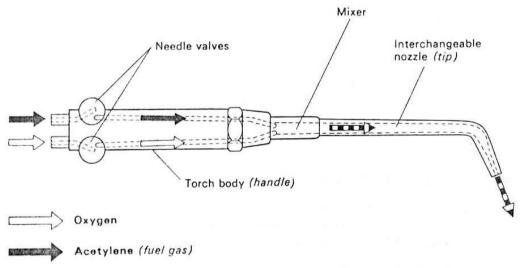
Parts of an oxy-acetylene welding torch
